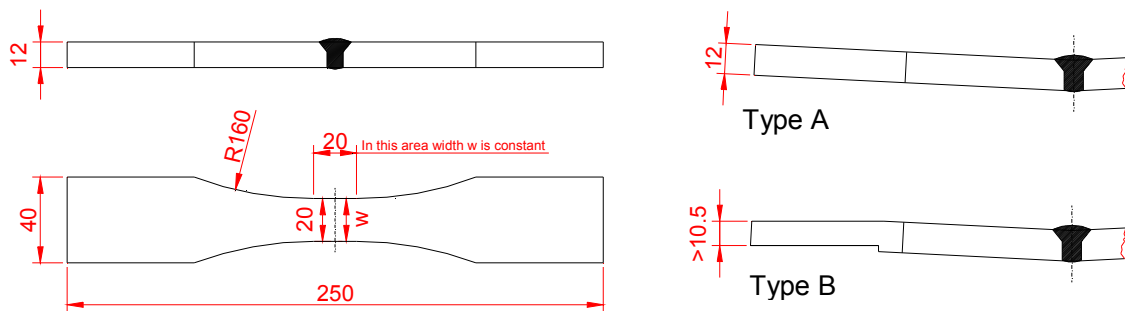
Geometry of welded-plate specimens for Type A and B.
